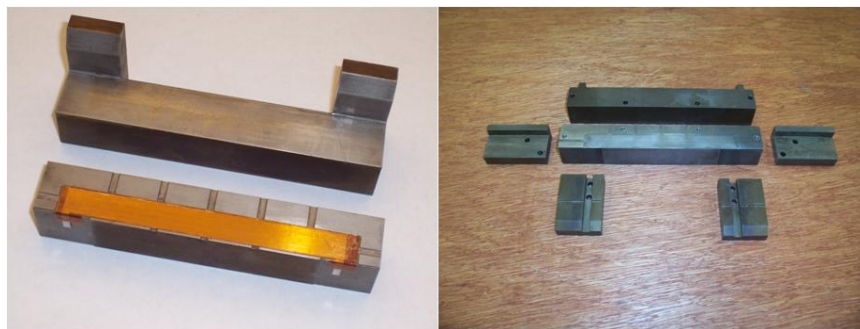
Old and New Alignment and Epoxy Curing Fixtures. This figure shows the old and new alignment and epoxy curing fixtures. One can see that the new alignment and epoxy curing fixture contains many more pieces which help control variables during assembly.
